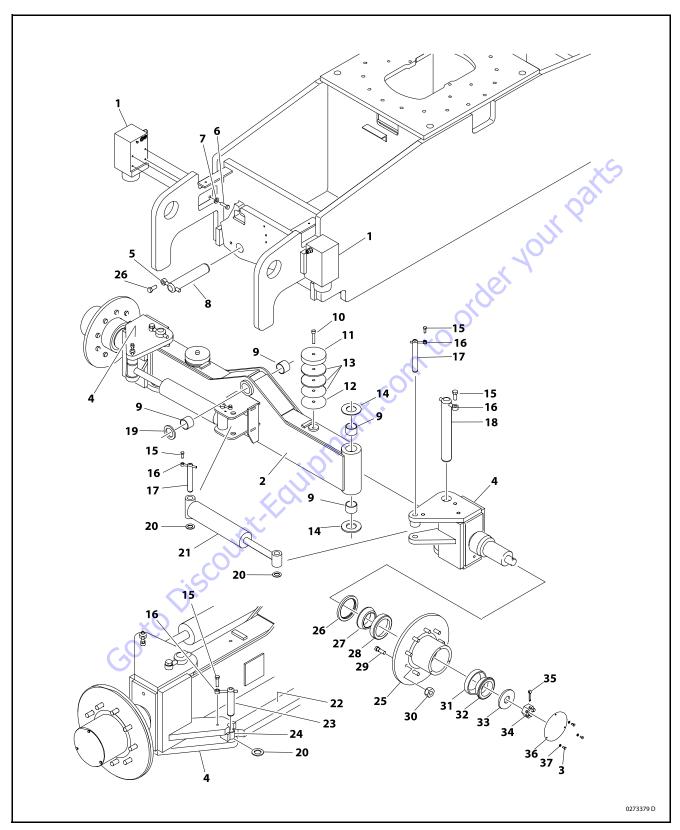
Front Axle And Steering Installations - With Tow Package (2WD) - Sheet 1 of 2
